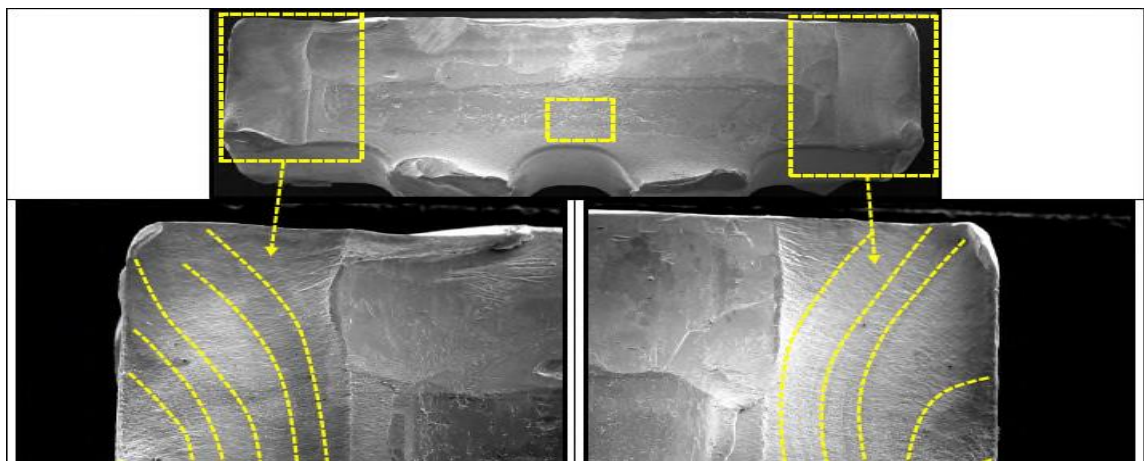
Fatigue cracks of the RGB couplings on the shaft side [source: P&WC].
